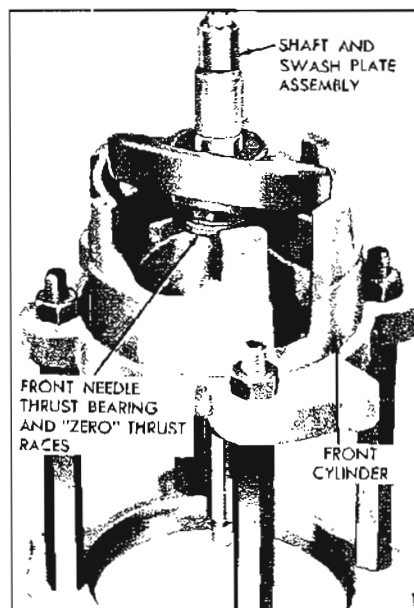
Shaft and Front Needle Thrust Bearing in Cylinder Half
